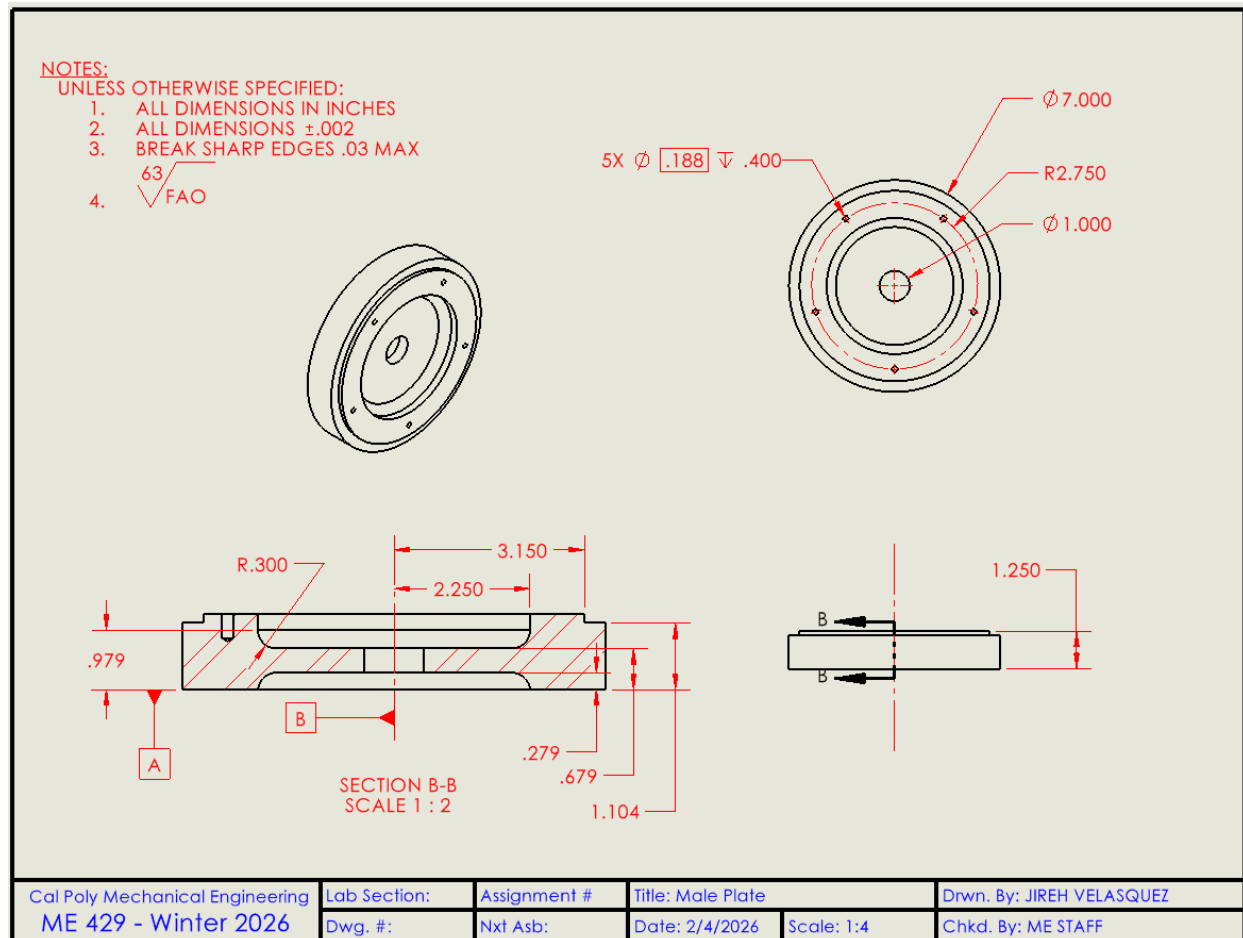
Detailed drawing of the Male Plate for assemblies 1000 and 2000
